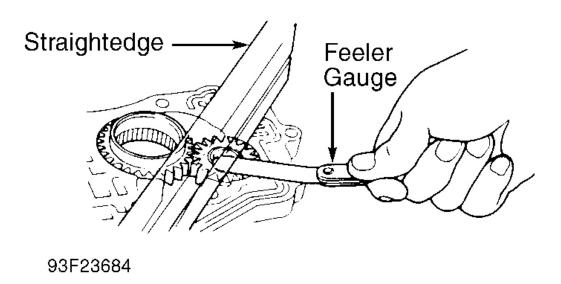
Measuring Oil Pump Clearances Checking Thrust Clearance Courtesy of AMERICAN HONDA MOTOR CO., INC.
